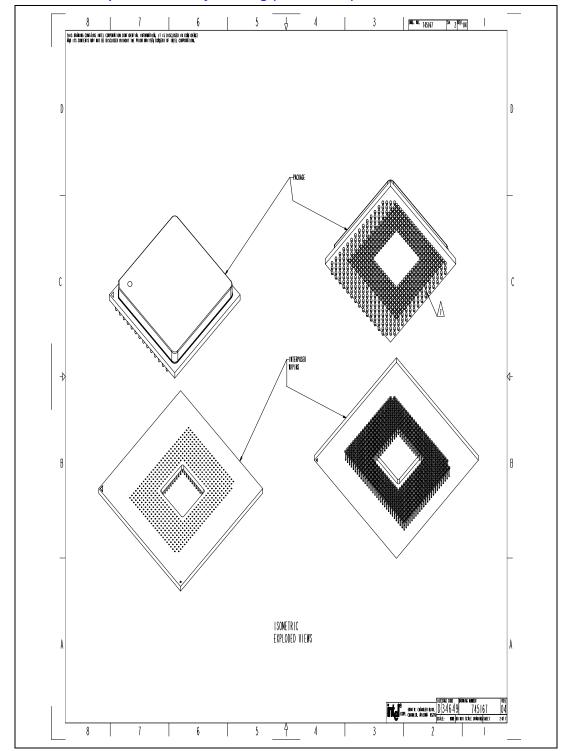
603-Pin Interposer Assembly Drawing (Sheet 2 of 7)
